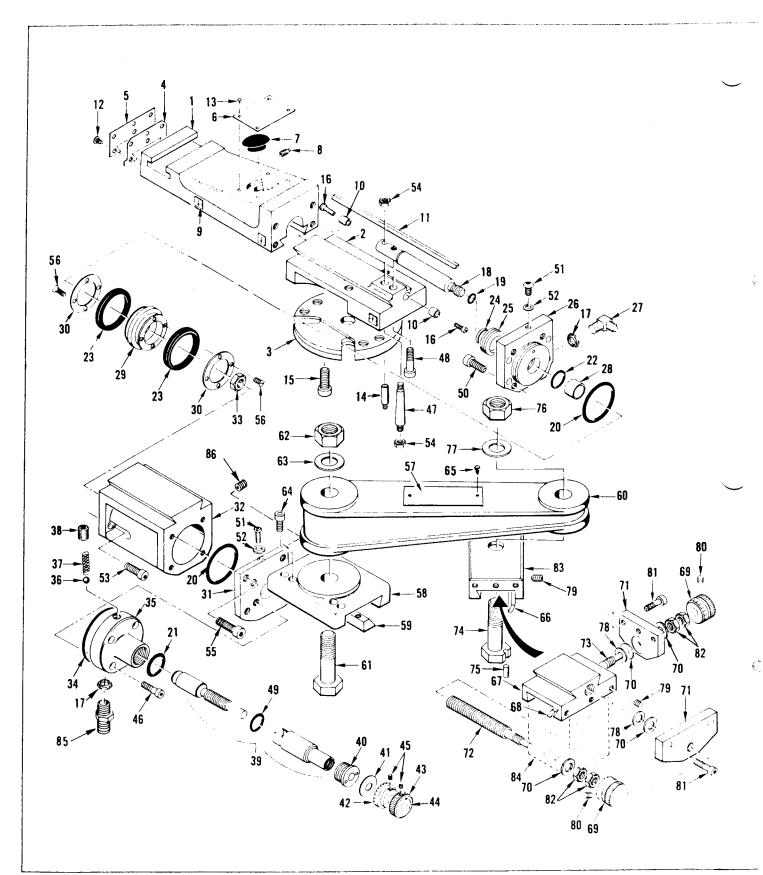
Exploded View of Mark V and VI Series Lathe Tracer Attachment
